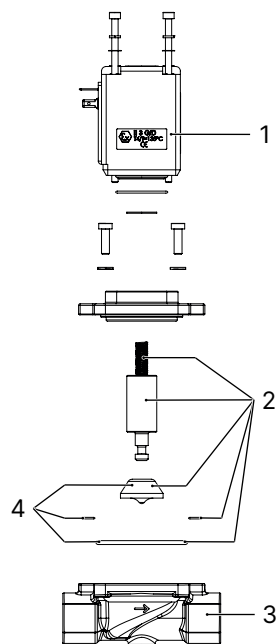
Overview of spare parts for solenoid valve Type 0283
